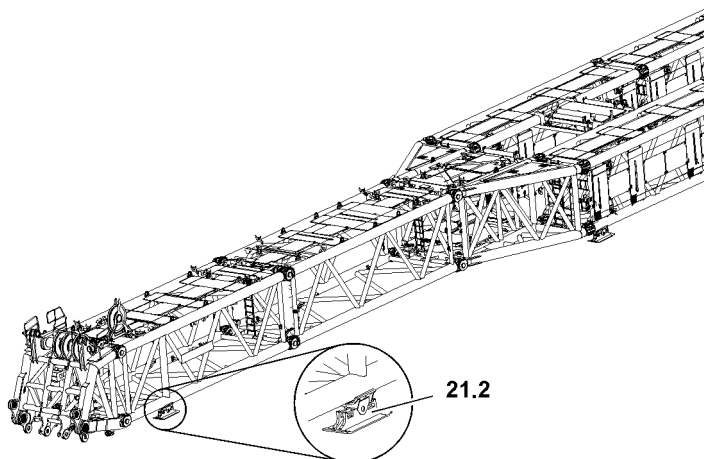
Assembling the S-intermediate sections / S-adapter / S-end section on the upper P-adapter — Changing the assembly shoes
